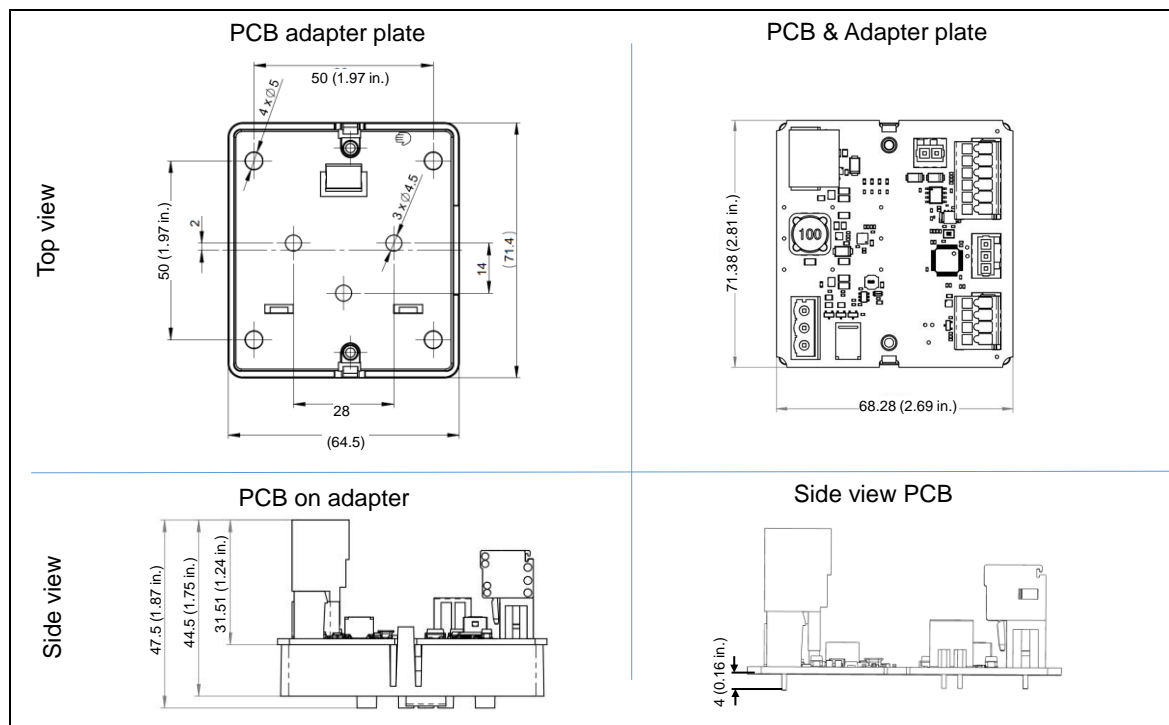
Dimensions CabSafe Controller 100 PCB carrier solutions
